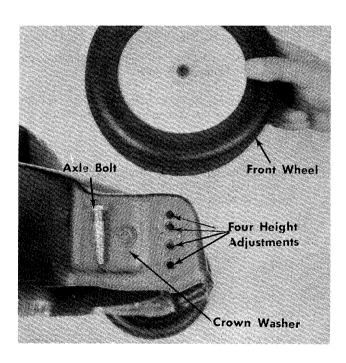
FRONT WHEEL HEIGHT ADJUSTMENT
